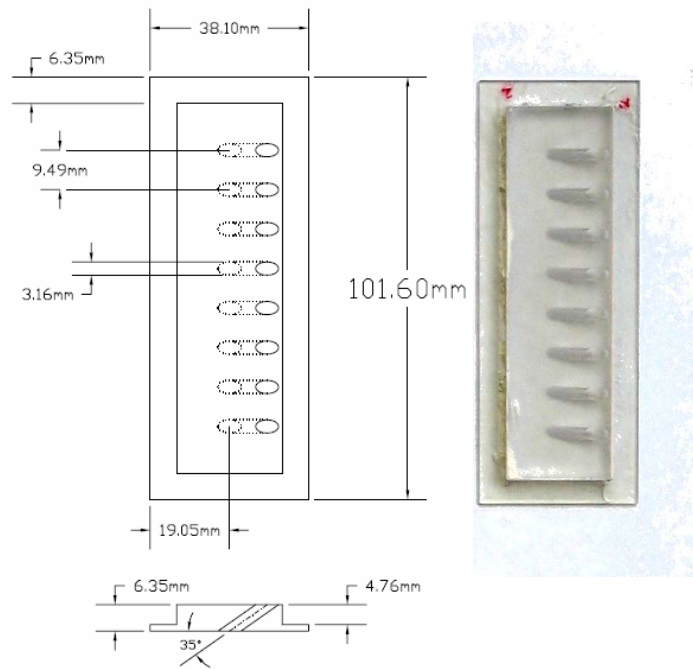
Nominal cylindrical hole coupon (DA0) design vs. manufactured piece
